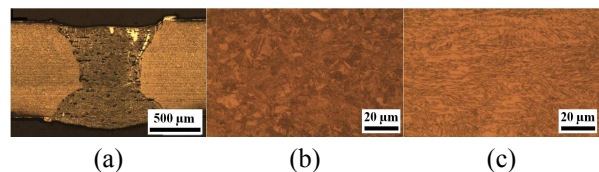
Microstructure of laser welded specimen with same thickness; (a) Section of weld zone, (b) Base metal, (c) Weld metal
